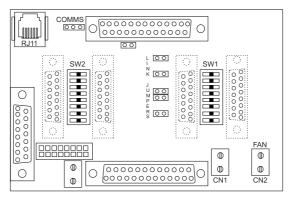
Layout Of Backplane PCB 220-01409-01
